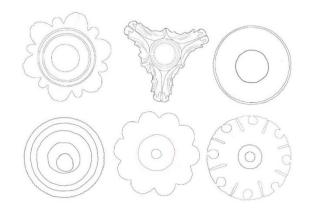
Drawing of the parts in Fig. 2 using Photoshop
